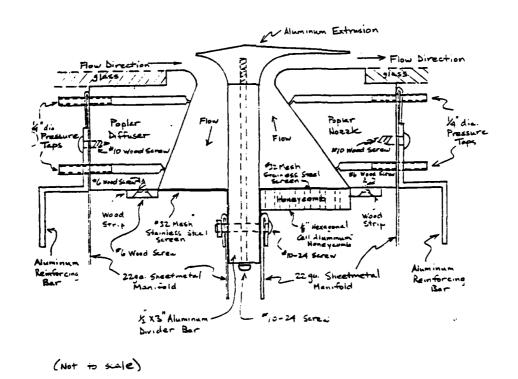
Cross sectional view of wall jet-wall suction assembly.
